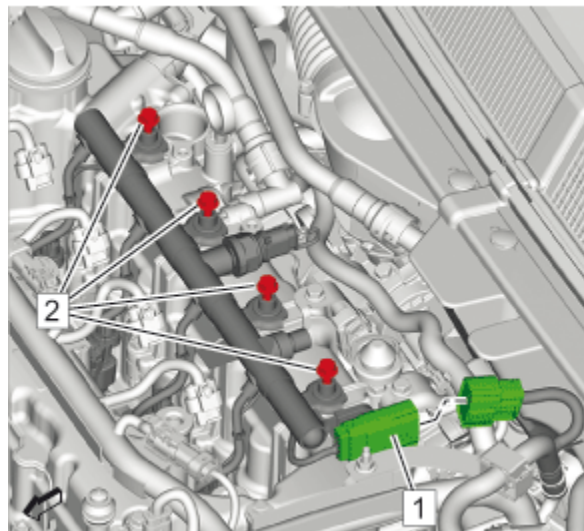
Fuel Injection Fuel Rail Wiring Harness And Fuel Rail Bolts
